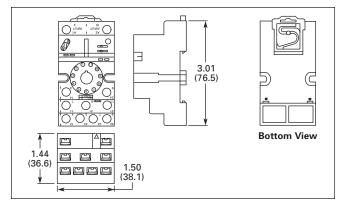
D3PA7 — Approximate Dimensions in Inches (mm)
